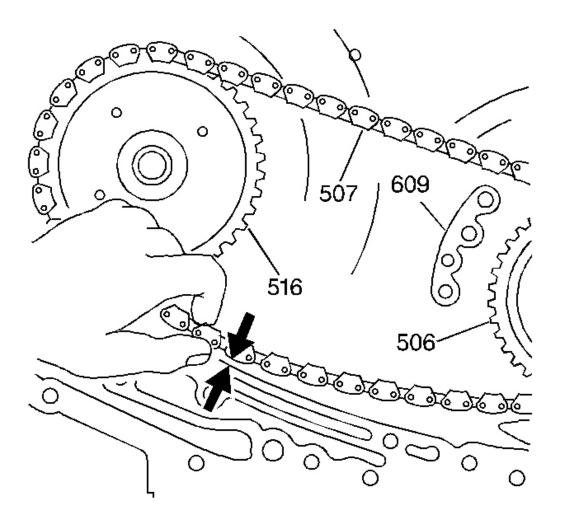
Measuring Drive Link Stretch Courtesy of GENERAL MOTORS CORP.
